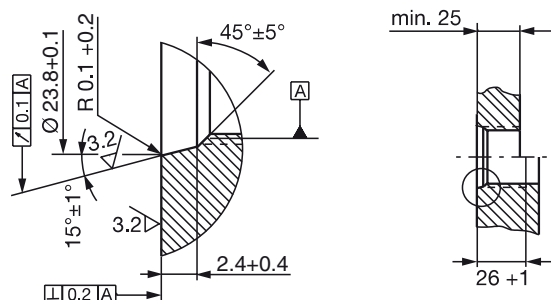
Mounting hole M22×1.5 per ISO 6149 O-ring 19.3×2.2
